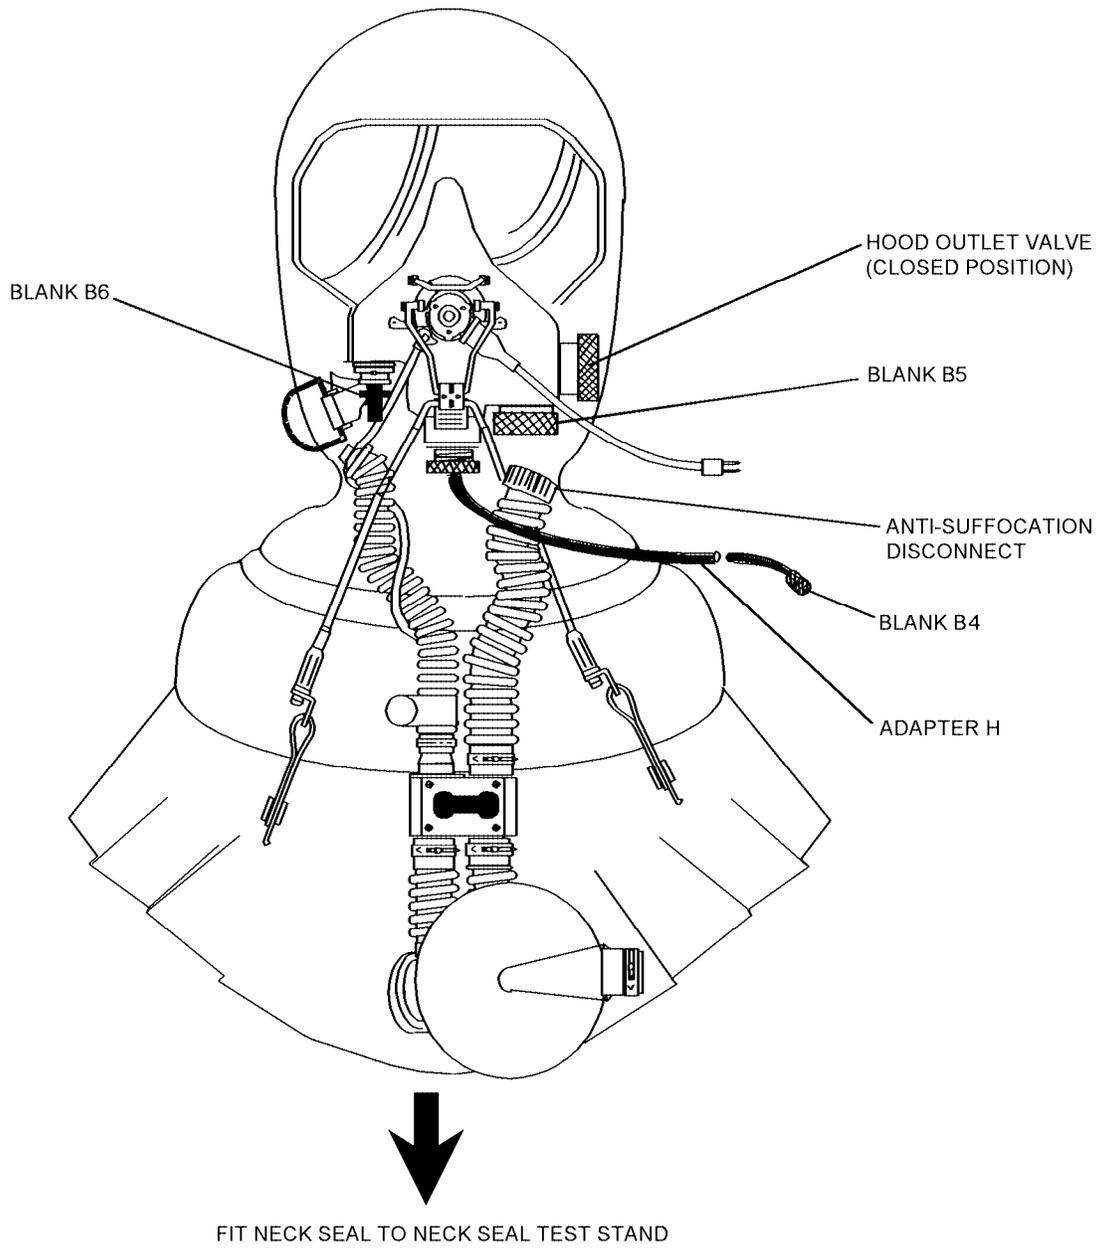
(V)2 thru (V)4 Variants - Hood Assembly - Overall Leakage Test
